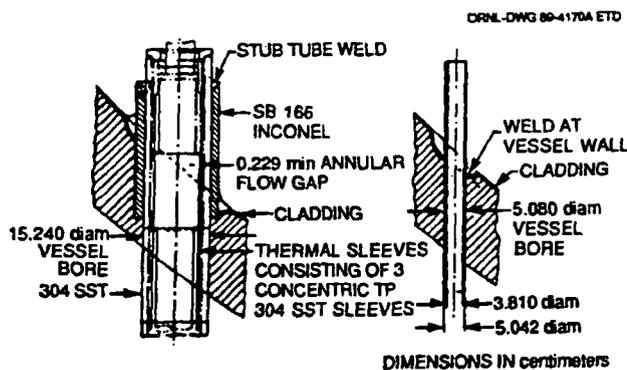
BWR control rod drive mechanism assemblies held in place by stainless steel-to-Inconel welds
